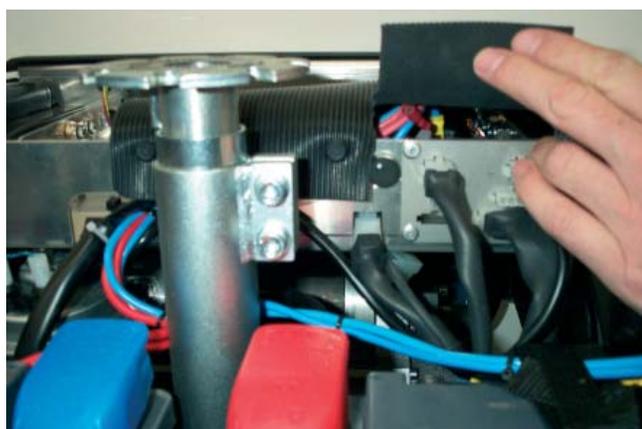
Install the potentiometer and push the three-pin plug out of the aluminium plate.
